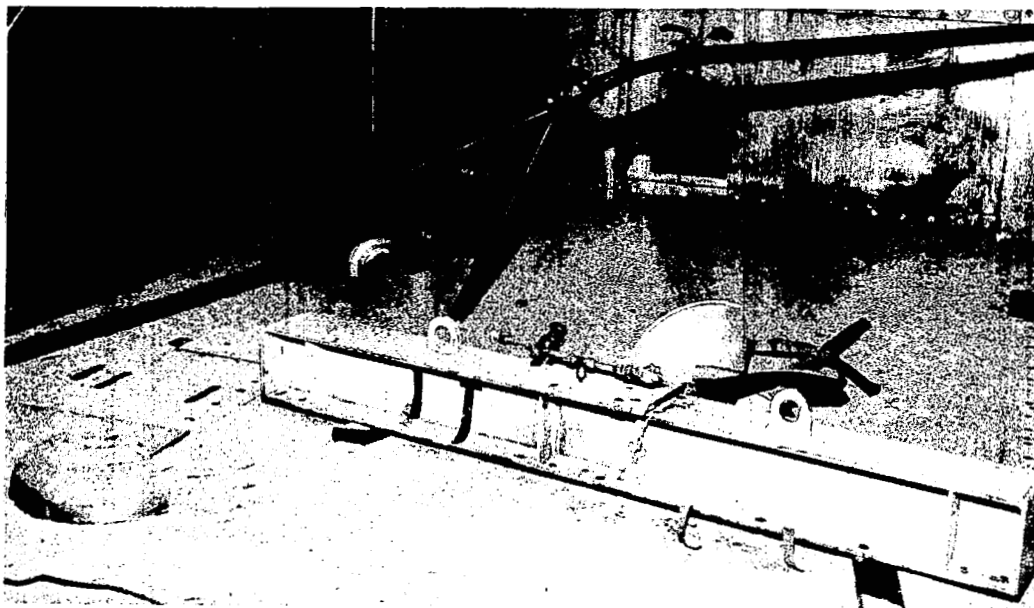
Fractured 2219-T87 Aluminum Chamber in Test Cell After Testing at -320°F .
